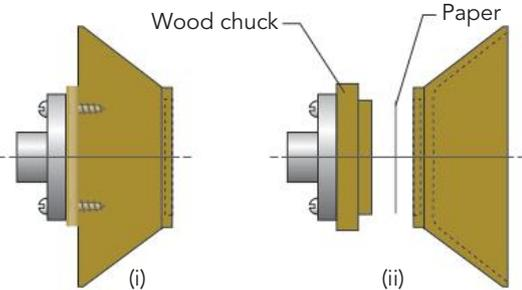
Turning a jamb chuck to fit in a recess. Paper may be used in the recess for a tight grip
